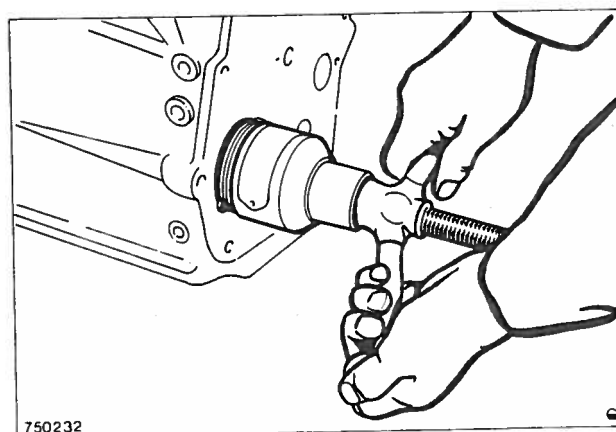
Removing/replacing the front camshaft bearing from the rear of the engine.
